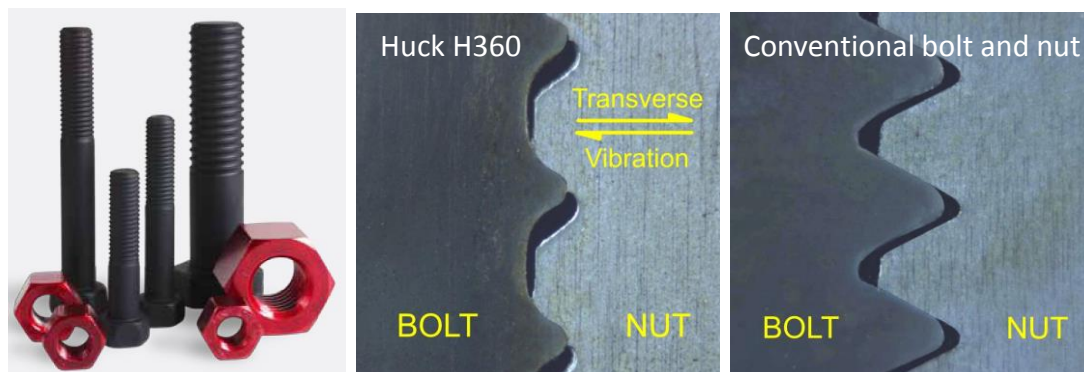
Comparison of cross-section between bolt and thread of H360 and conventional bolts [1]
